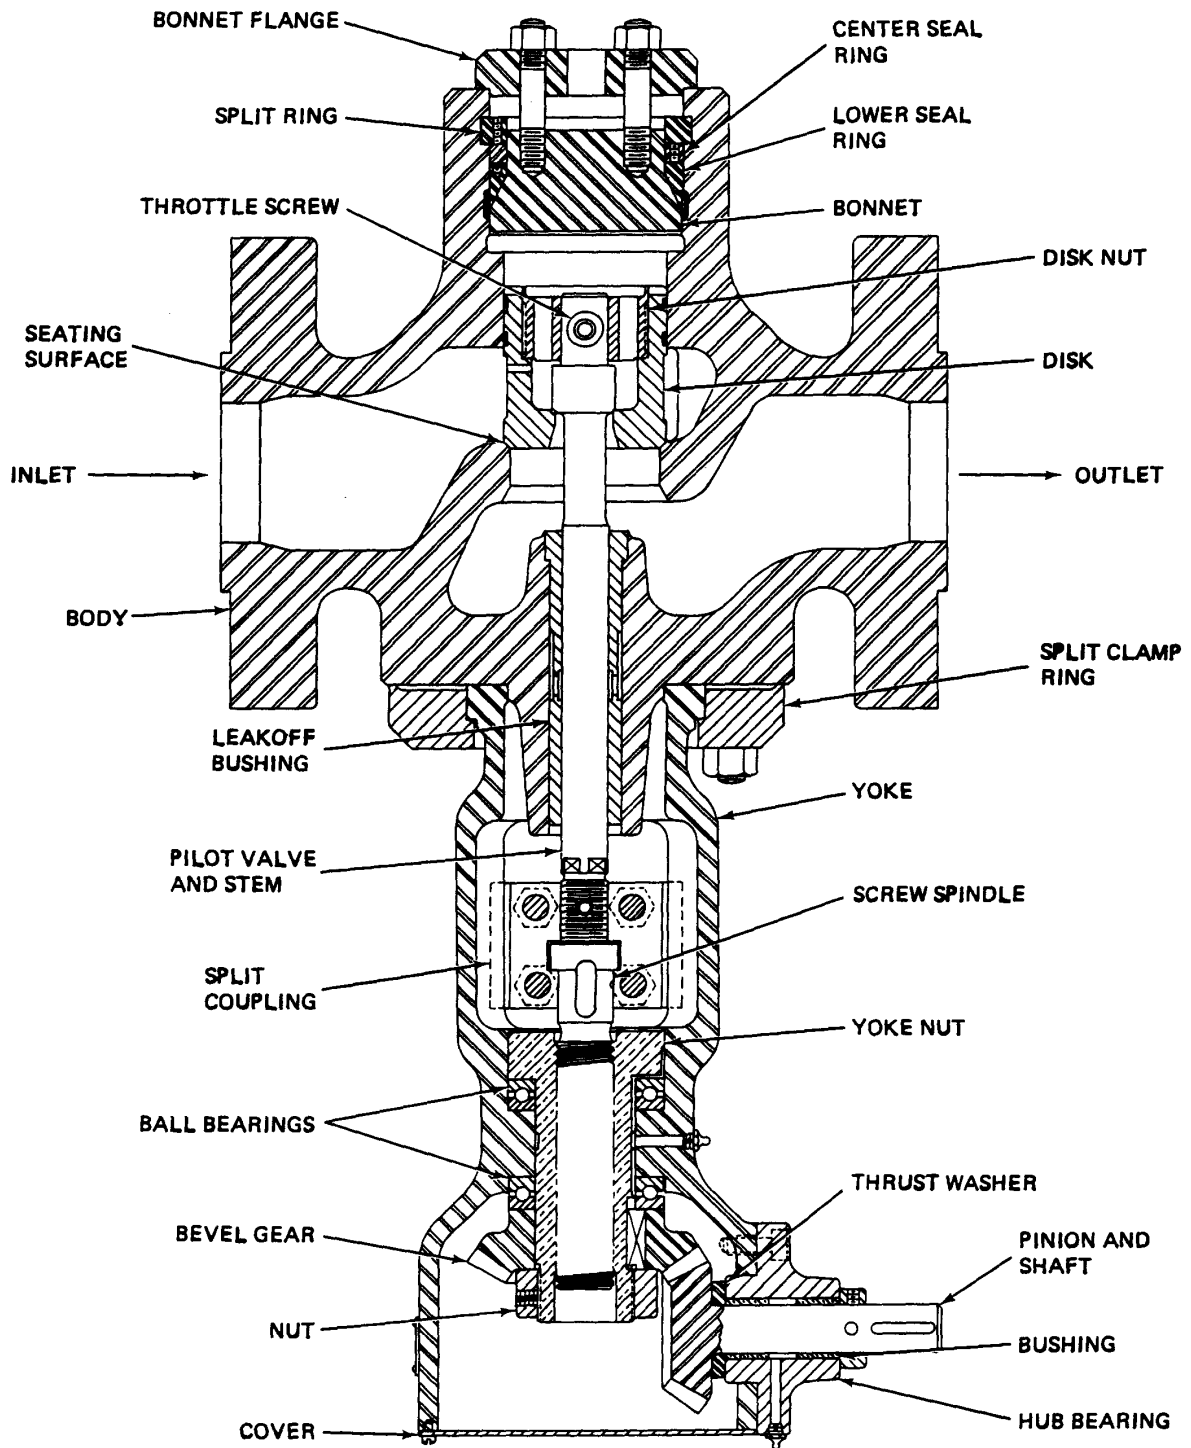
Astern Throttle Valve (Gimpel) (Typical)
